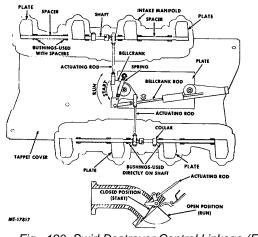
Swirl Destroyer Control Linkage (Early Production Engines Only)
